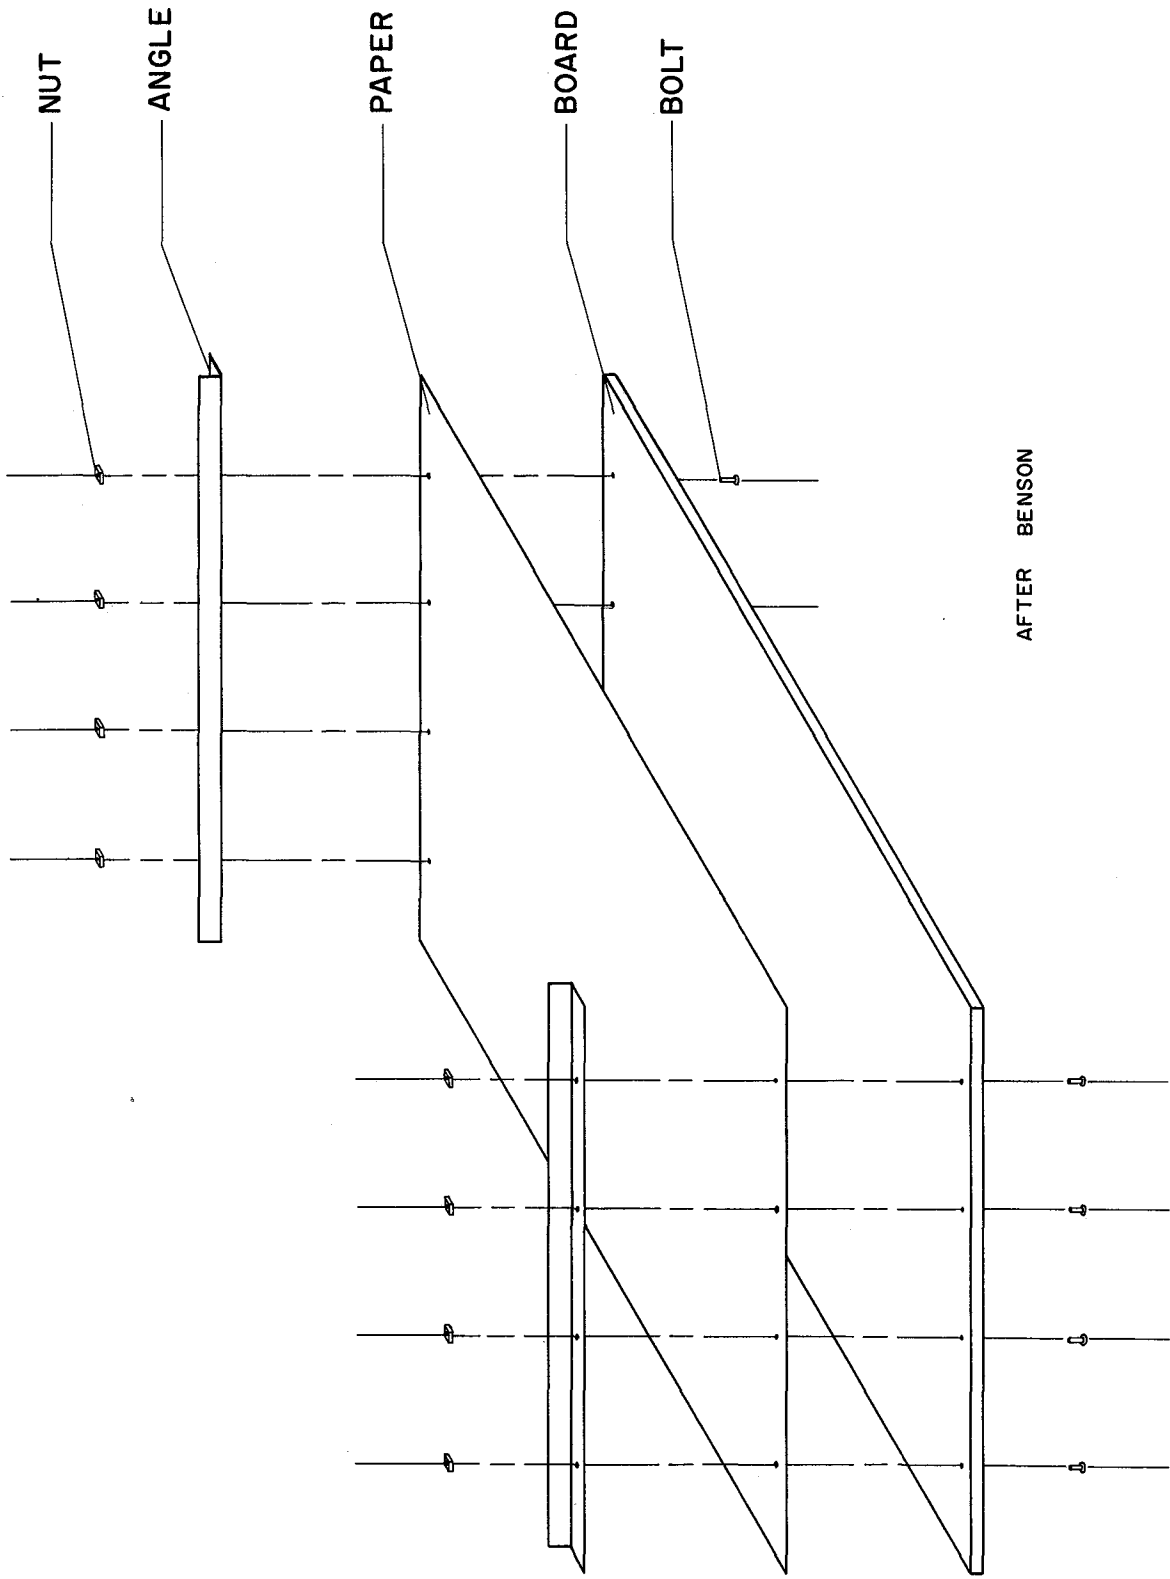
"EXPLODED" ASSEMBLY OF BOARD, PAPER AND ANGLES
